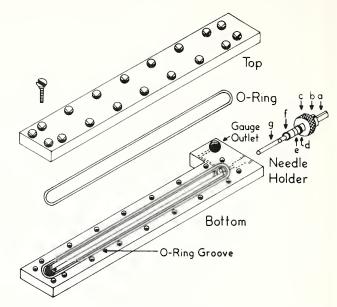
An exploded view of the needle chamber. Dimensions of bottom are 1/2 by 1-1/2 by 9-5/8 inches. Plexiglas top is 3/8 inch thick. (a, flattened stem for rotating needle; b, removable retaining ring; c, knurled knob; d, screw threads; e, polyethylene washer; f, rubber O-ring; g, glass tube for holding needle.)
